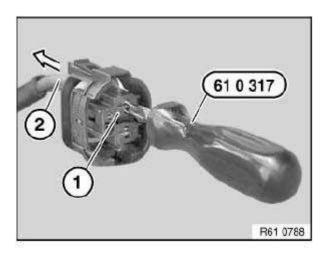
Identifying Special Tools (61 0 317) Courtesy of BMW OF NORTH AMERICA, INC.
